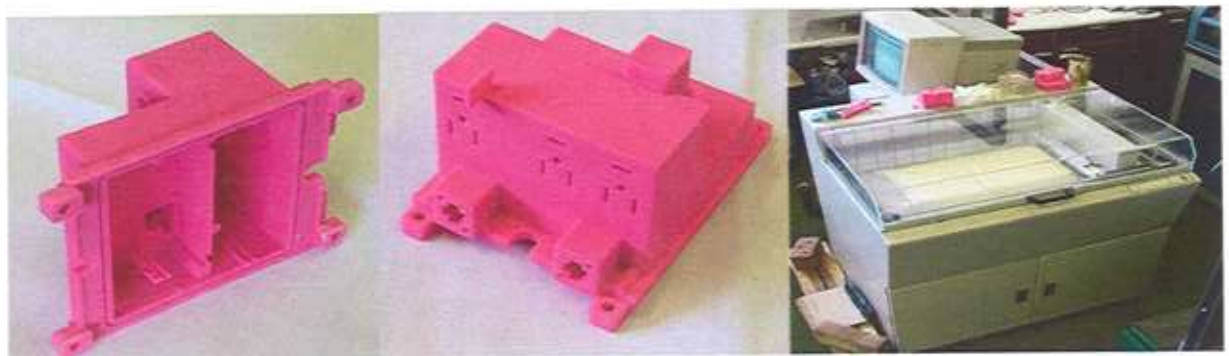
Example Parts and picture of Z-Corps Machine
